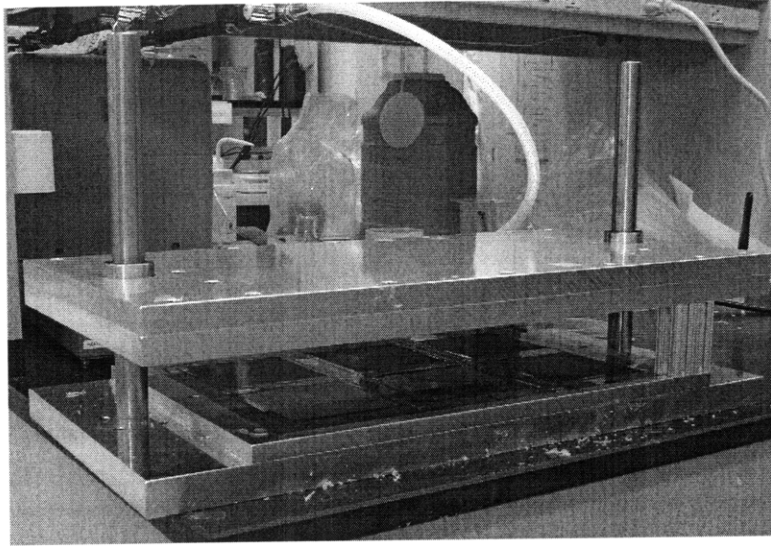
The assembled stamp jig. The large plates were manufactured by a local machinist from MIC-6 precision ground aluminum.
